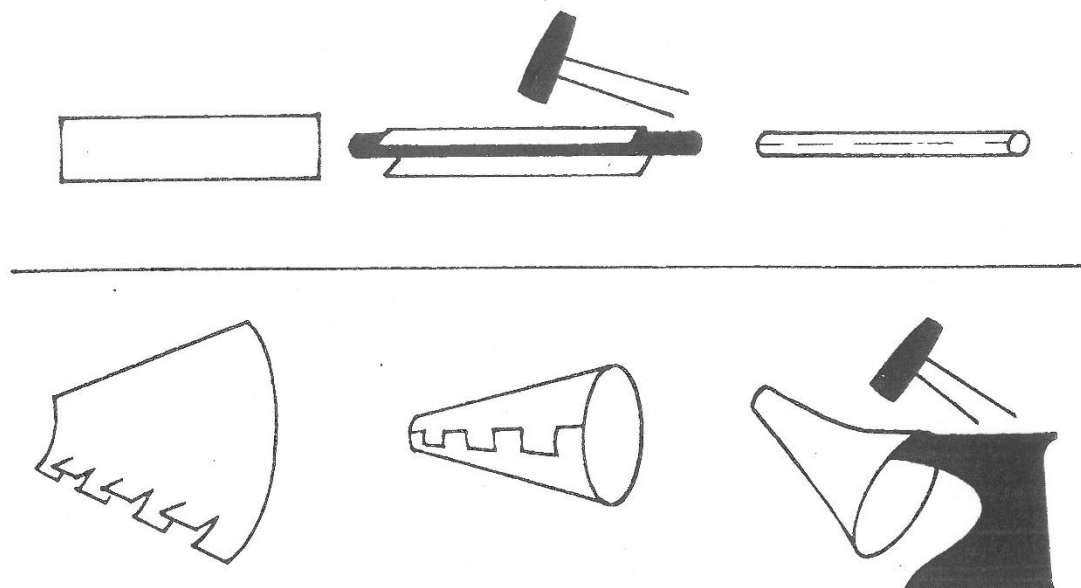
FORMING OF METAL SHEETS – Top: making a tube. A sheet is hammered around and soldered. – Bottom: making a bell. A sheet is cut in a triangle-form and one side is cut in stripes. The sheet is bent and soldered, thus forming a "cone", whereafter the cone is hammered into the required "bell-form".
